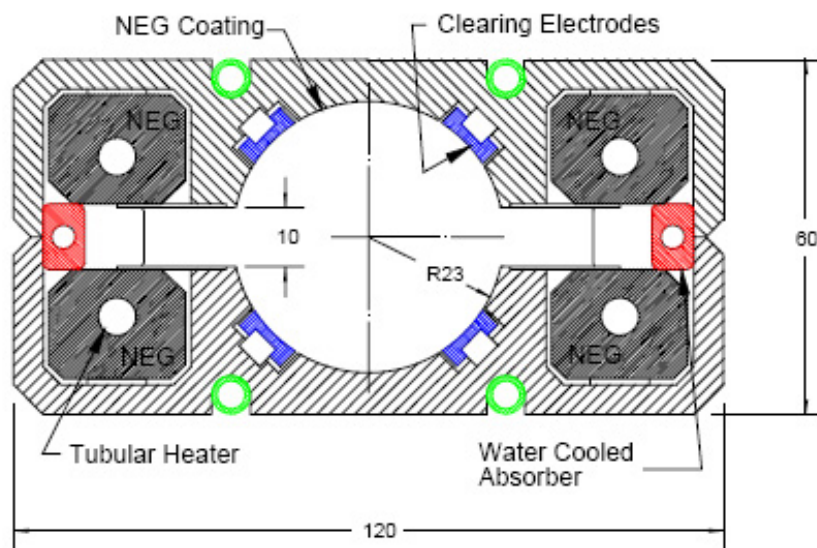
ILC damping ring wiggler chamber; dimensions in mm.
